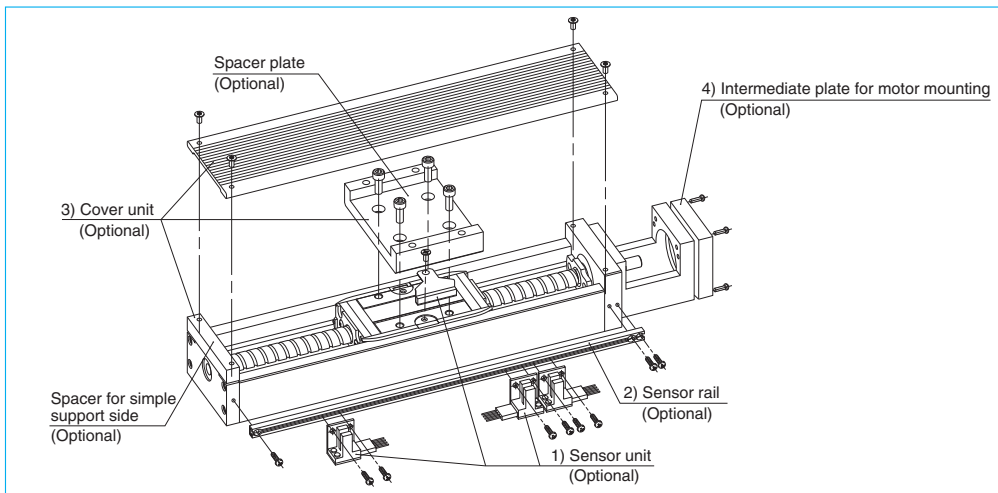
Assembly: Optional components for MCH10 (example)
